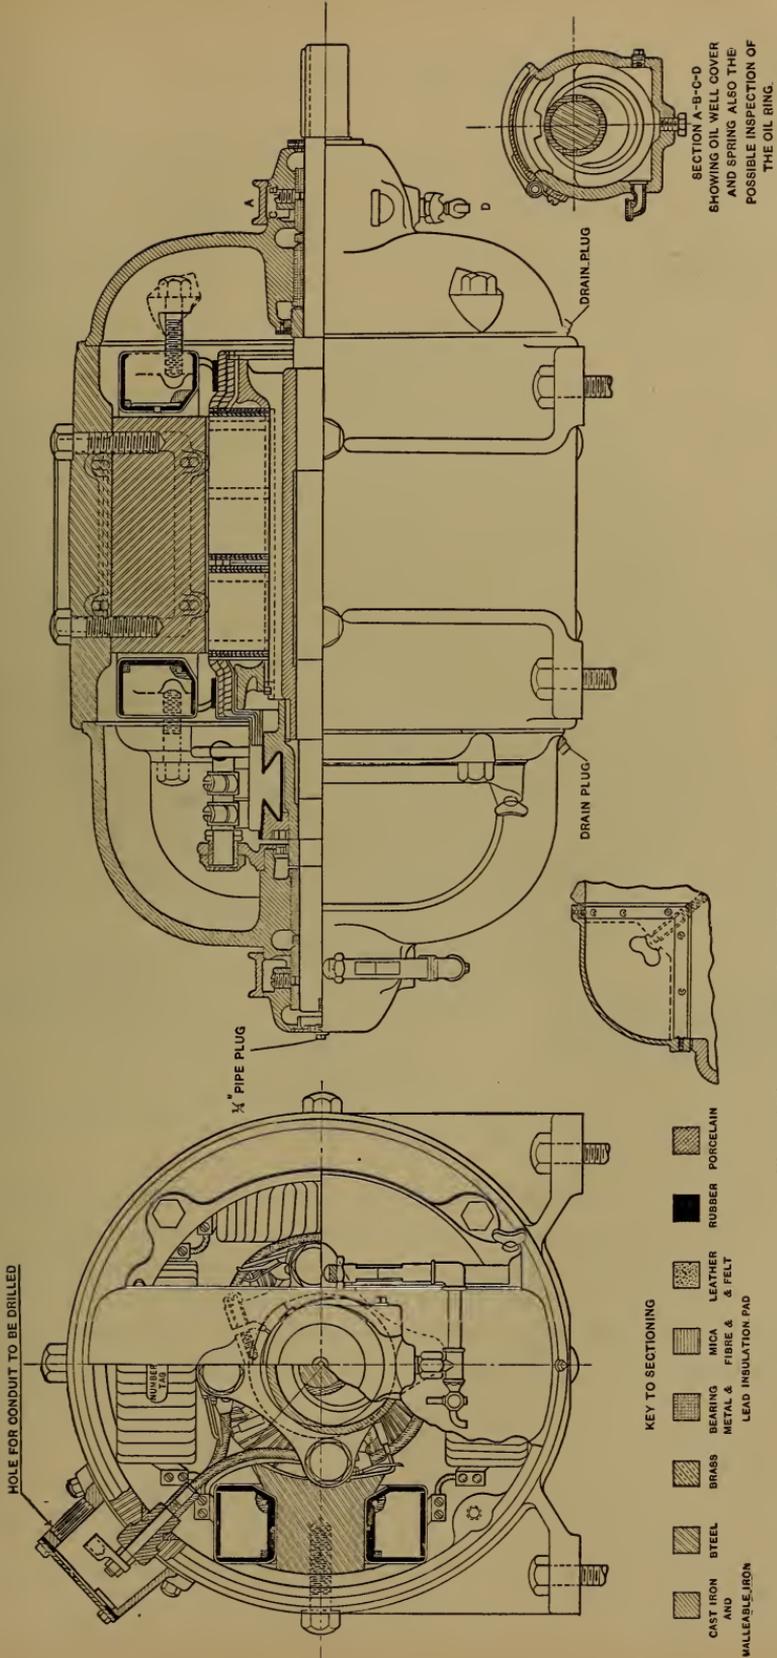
Assembly CR Form "G" Motor. Gen. Elec. Co.
